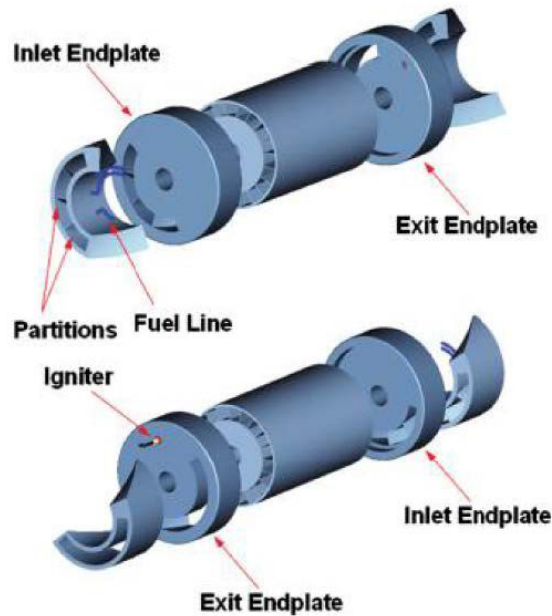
Schematic of Wave rotor combustor with igniter on endplate [8].
